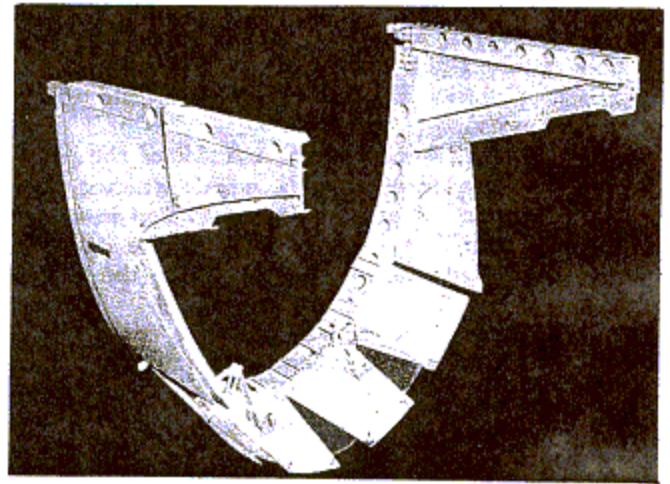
Rear Side Cowl and Cowl Flap Assembly
